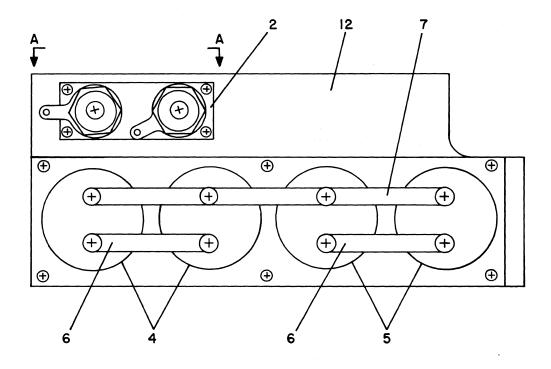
CAPACITOR ASSEMBLY A2
